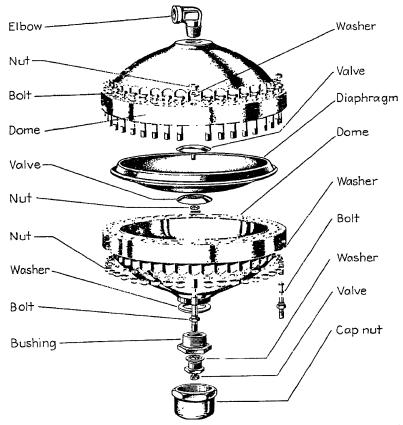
Spherical pressure-tank assembly. (Courtesy of Douglas Aircraft Co.)
